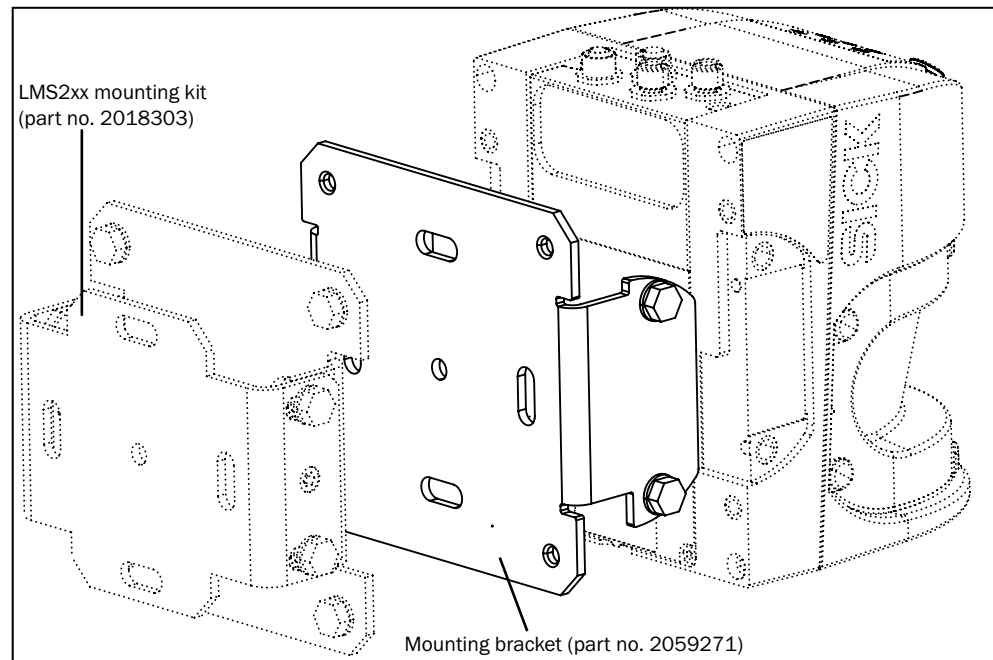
Mounting Bulkscan® LMS511 with mounting bracket on an existing mounting kit LMS2xx
